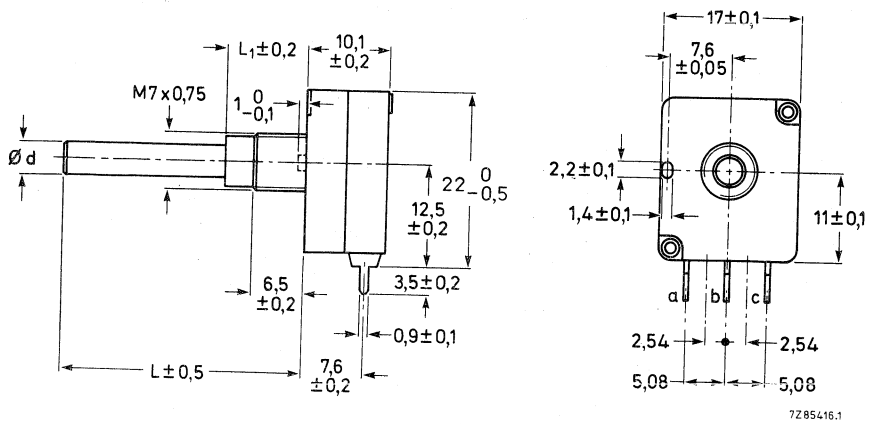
Single potentiometer with mounting bush M7 x 0,75 mm.
